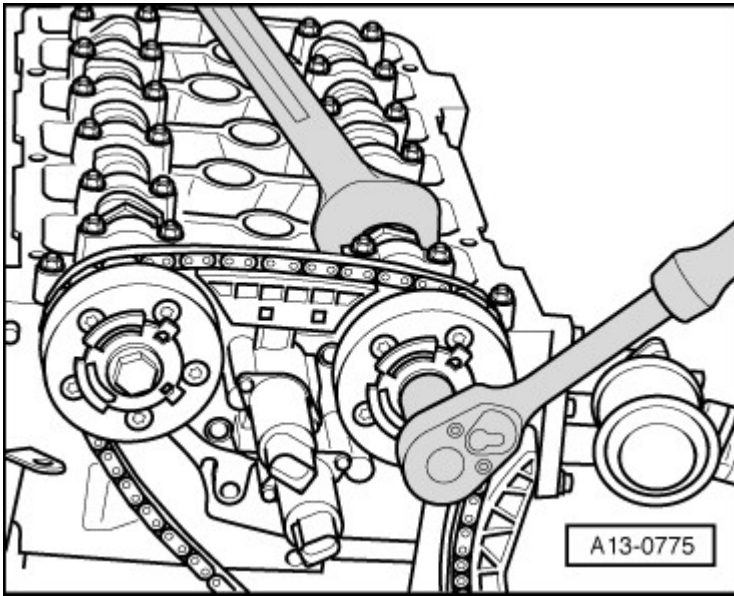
Identifying Tools To Loosen Exhaust Camshaft Adjuster Bolt
